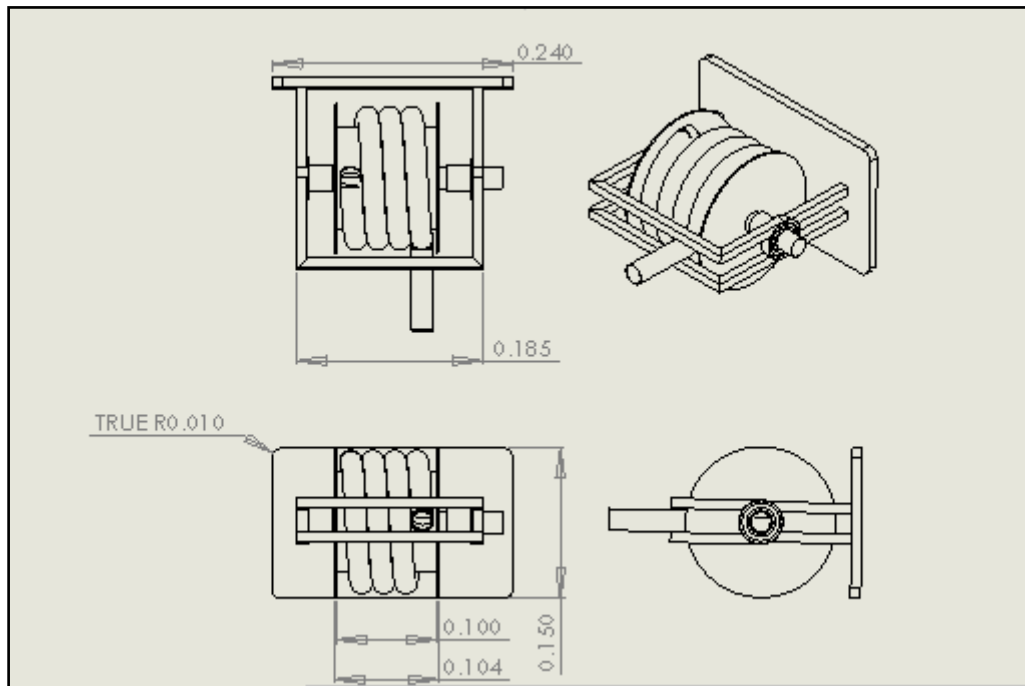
Orthographic view of project design using SolidWorks 2011.
